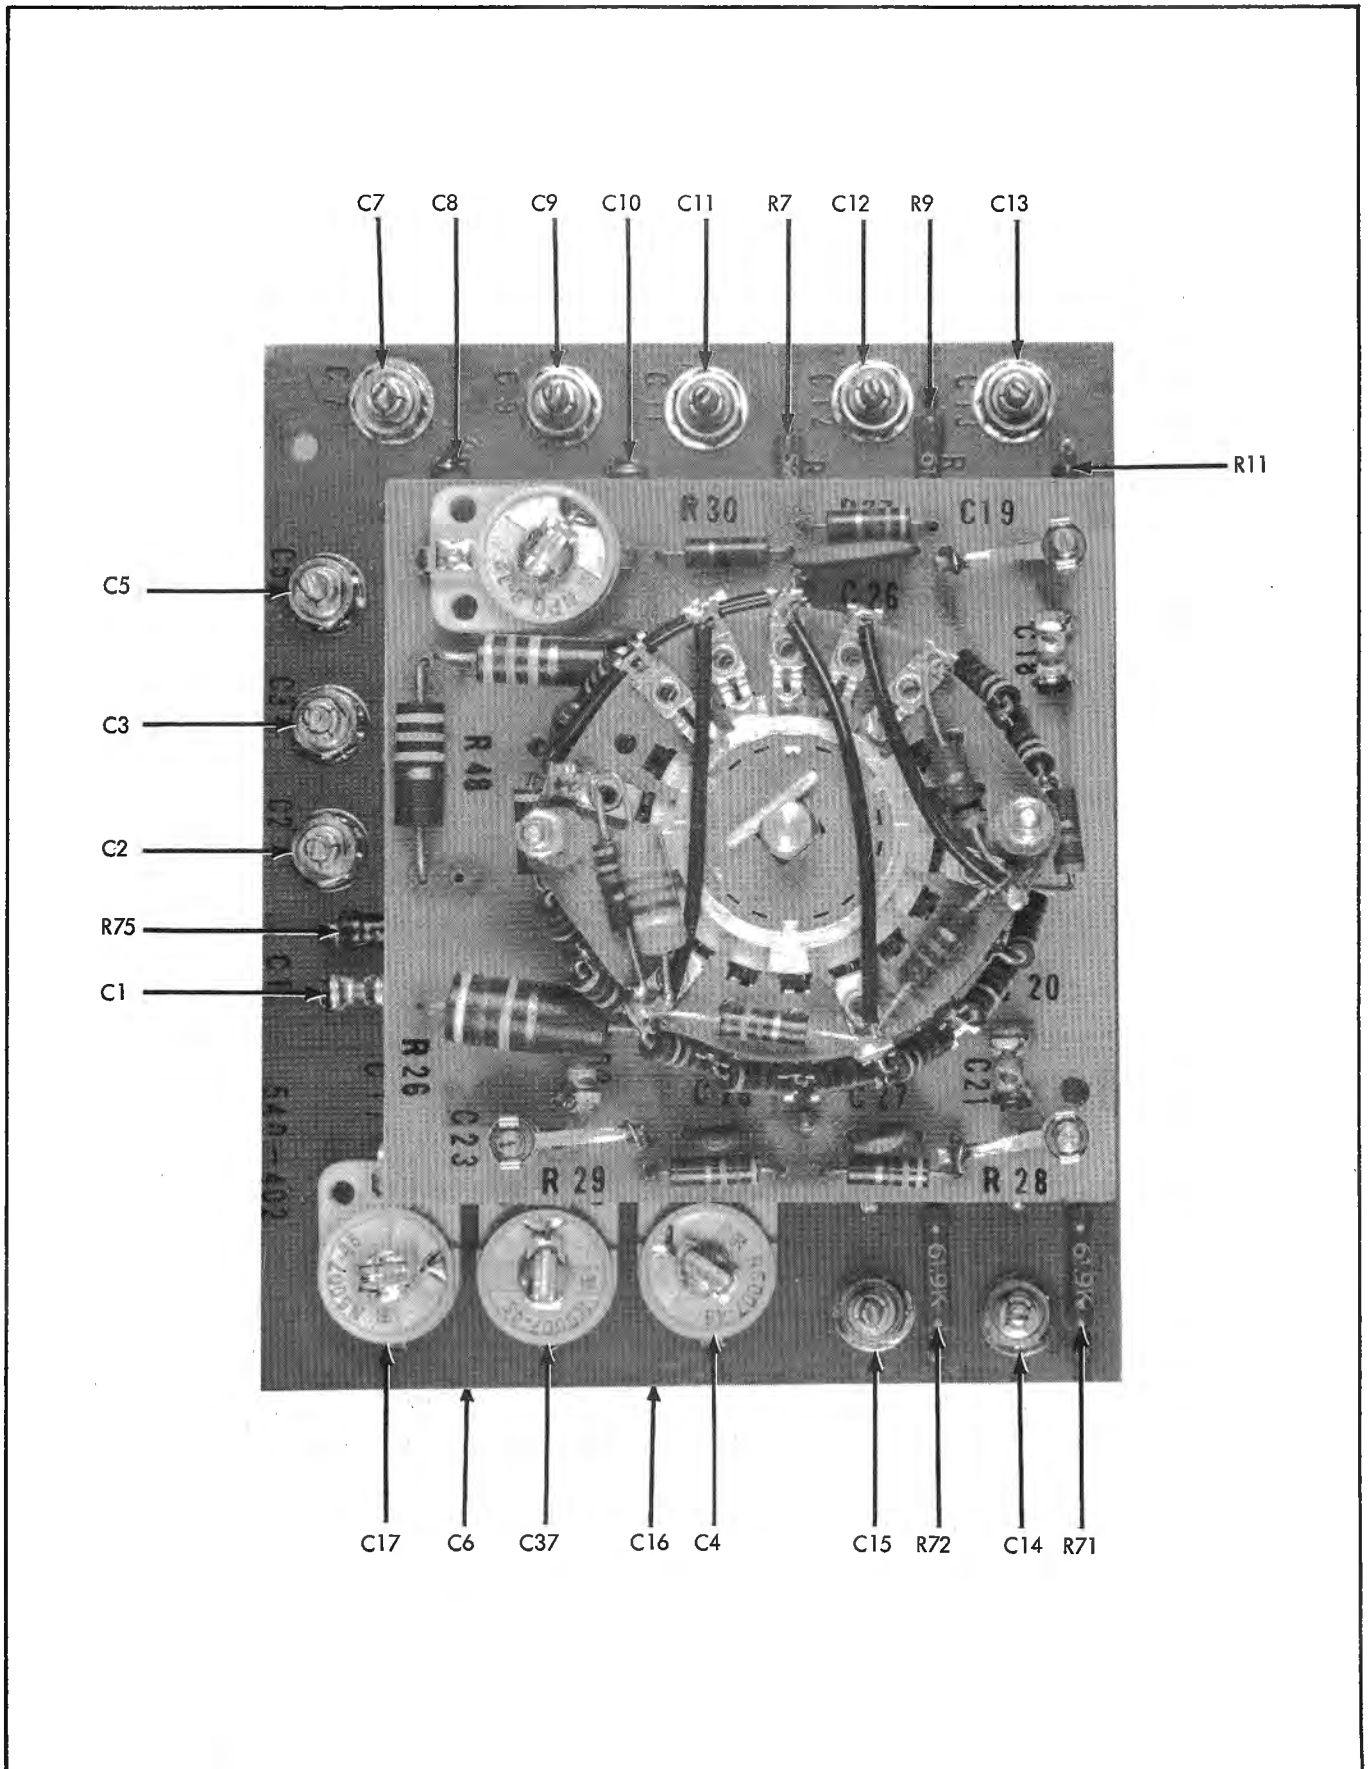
B. COMPENSATION BOARD ASSEMBLY
